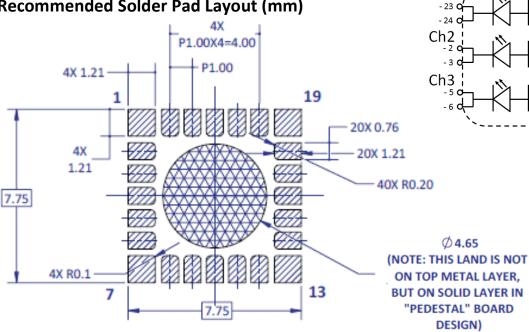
Recommended solder pad layout for anode, cathode, and thermal pad.
